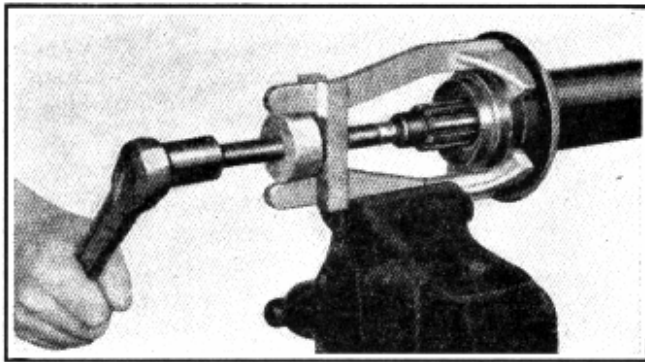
Removing Propeller Shaft Intermediate Bearing
